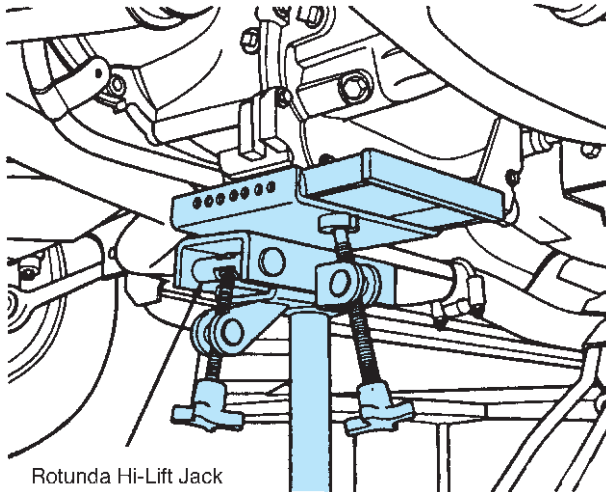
A transmission jack has been positioned to support this transaxle before removing the mounts and supports. (Courtesy of Ford Motor Company)
